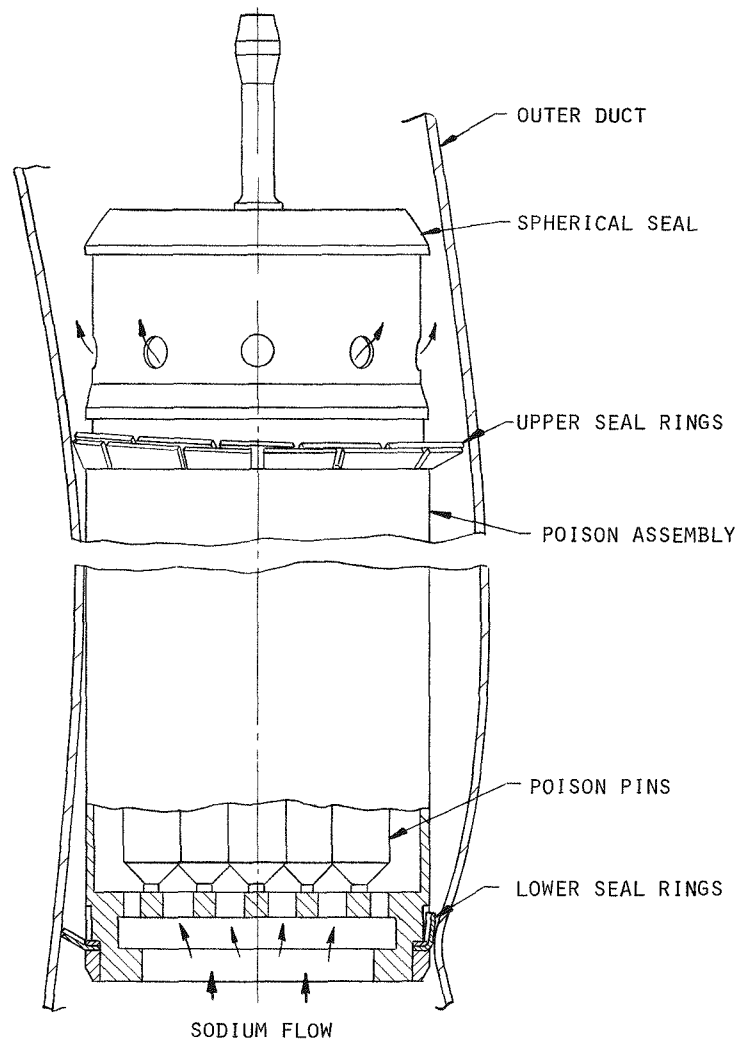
FLEXIBLE SEAL RINGS CONCEPT
